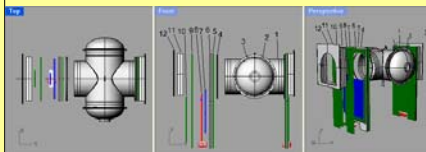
Left: The load lock seen from above the cross tube. Middle: Seen from the side with the access doors fronting (3). Right: Seen in perspective from the side. The left door of the load lock is taken a part so individual parts can be distinguished.
